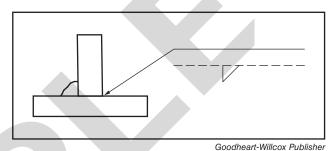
The dashed line in this figure indicates that a fillet weld should be made on the other side of the joint.
